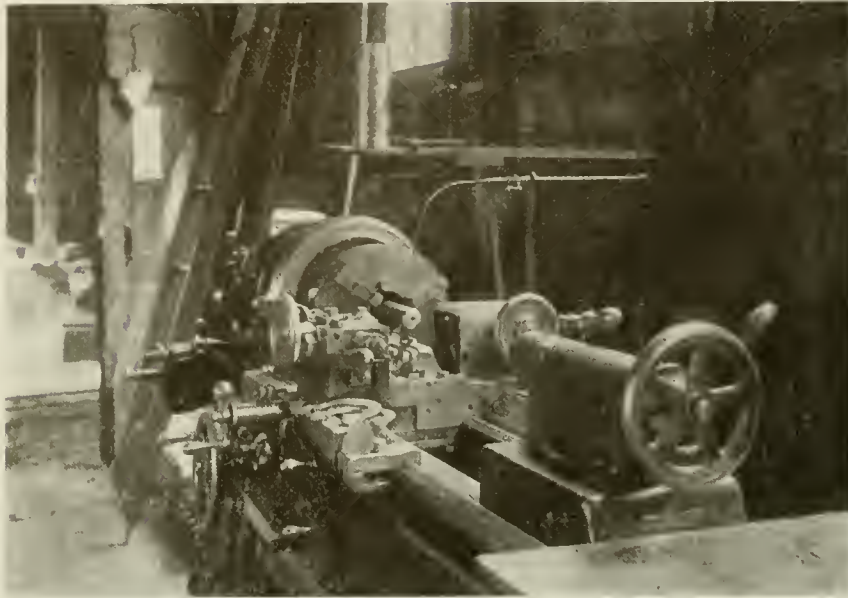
COPPER BAND RECESSING EQUIPMENT.
